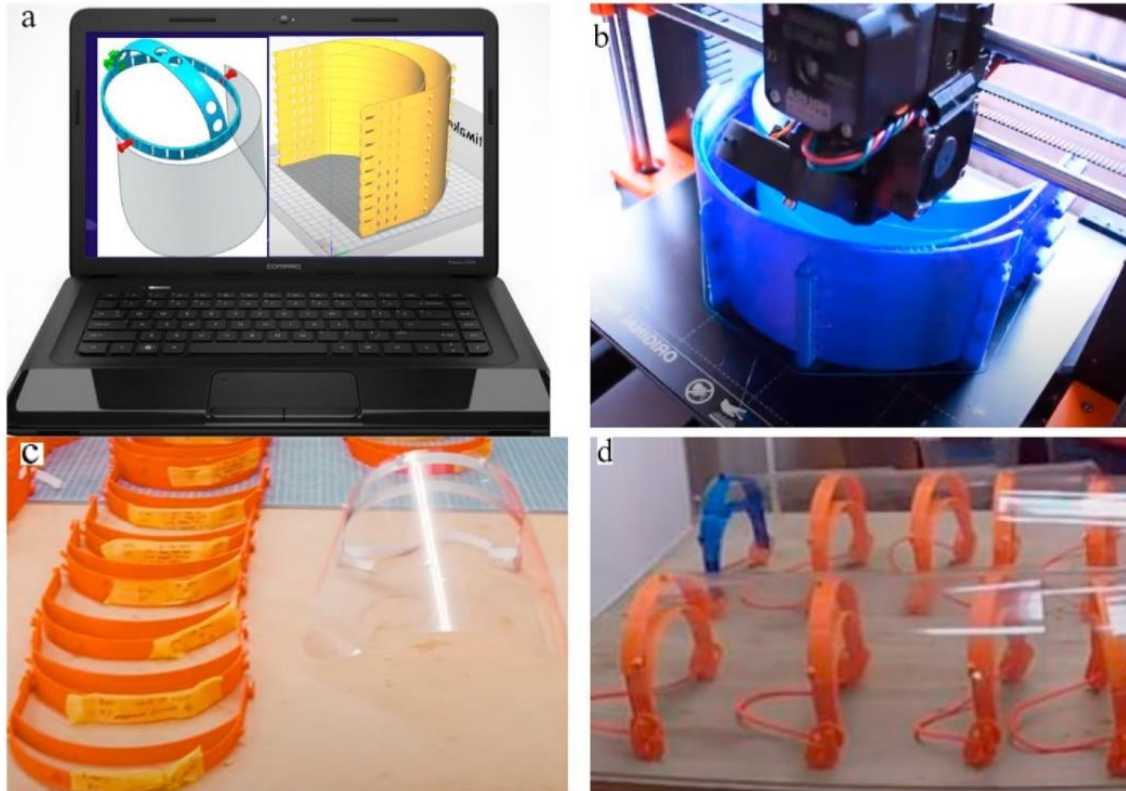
Respirator face shields fabricated by fused deposition modelling: (a) computer-aided design (CAD) of face shield holder and shield; (b) 3D printing procedure; (c) fabricated shield holder and shield pieces; (d) final fabricated respirator face shields after mounting the pieces. Reprinted with permission from Ref. [20].
